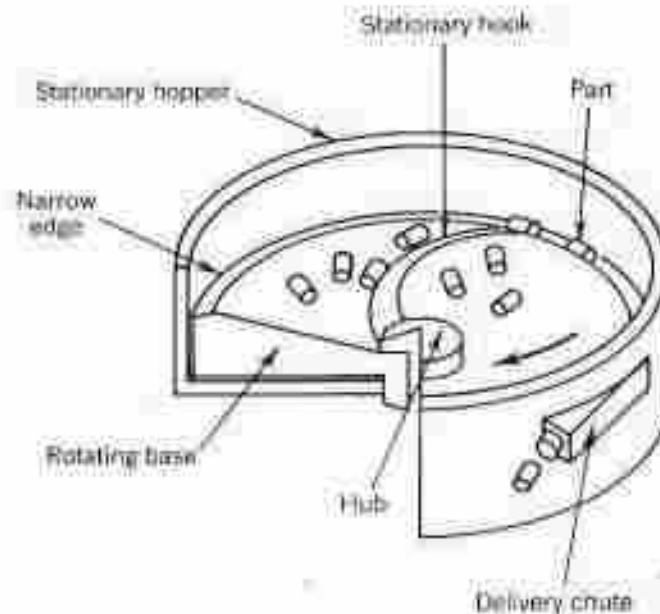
Rotating base hopper for gentle feeding of delicate cylindrical parts
